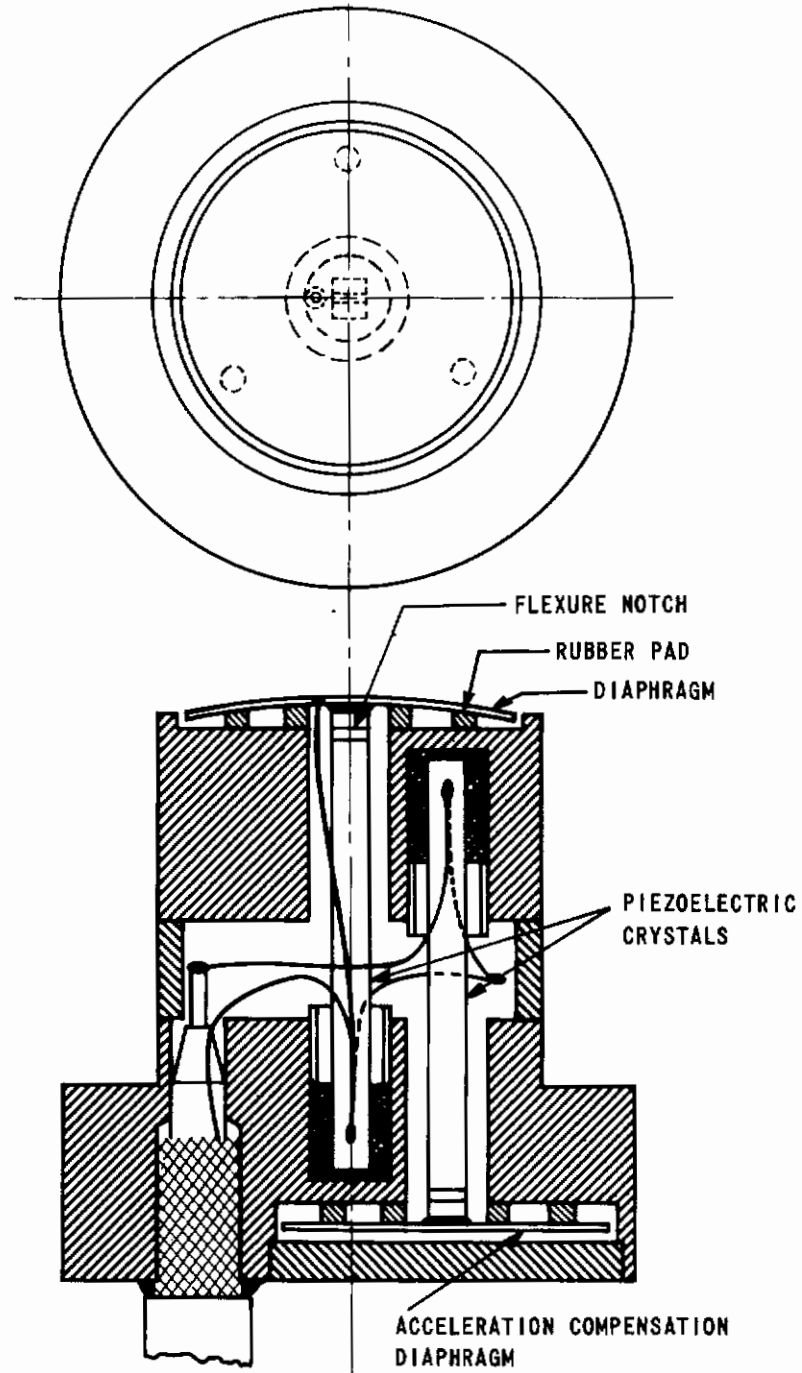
DRAWING OF SKIN FRICTION GAGE PZT25-37AC
